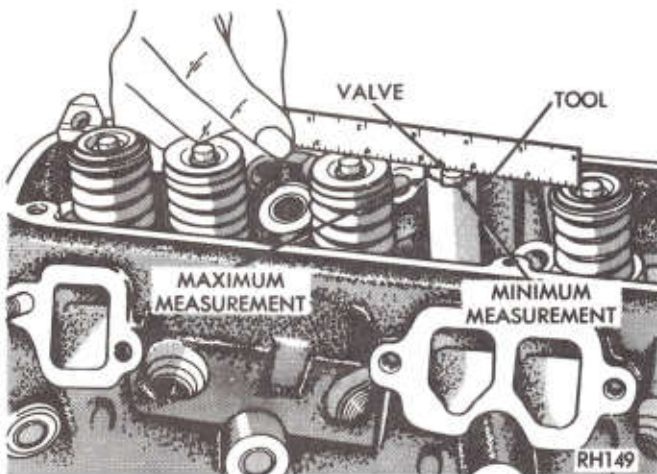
Measuring Valve Stem Length with Tool C-396B
